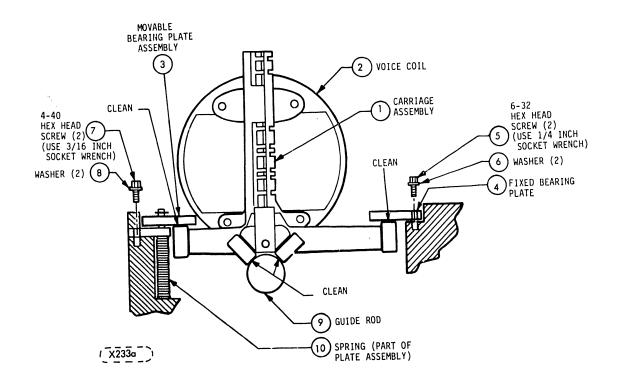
CARRIAGE RAILS AND BEARINGS
